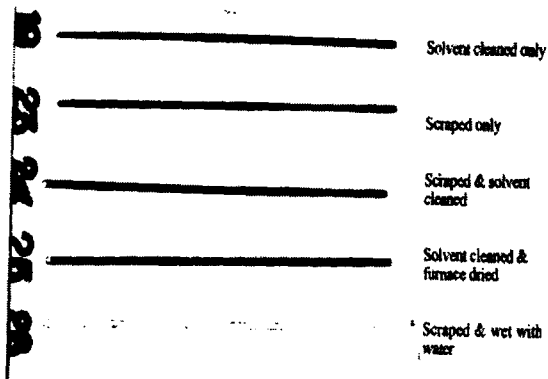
X-ray radiographic image of rectangular bar samples containing pores.
